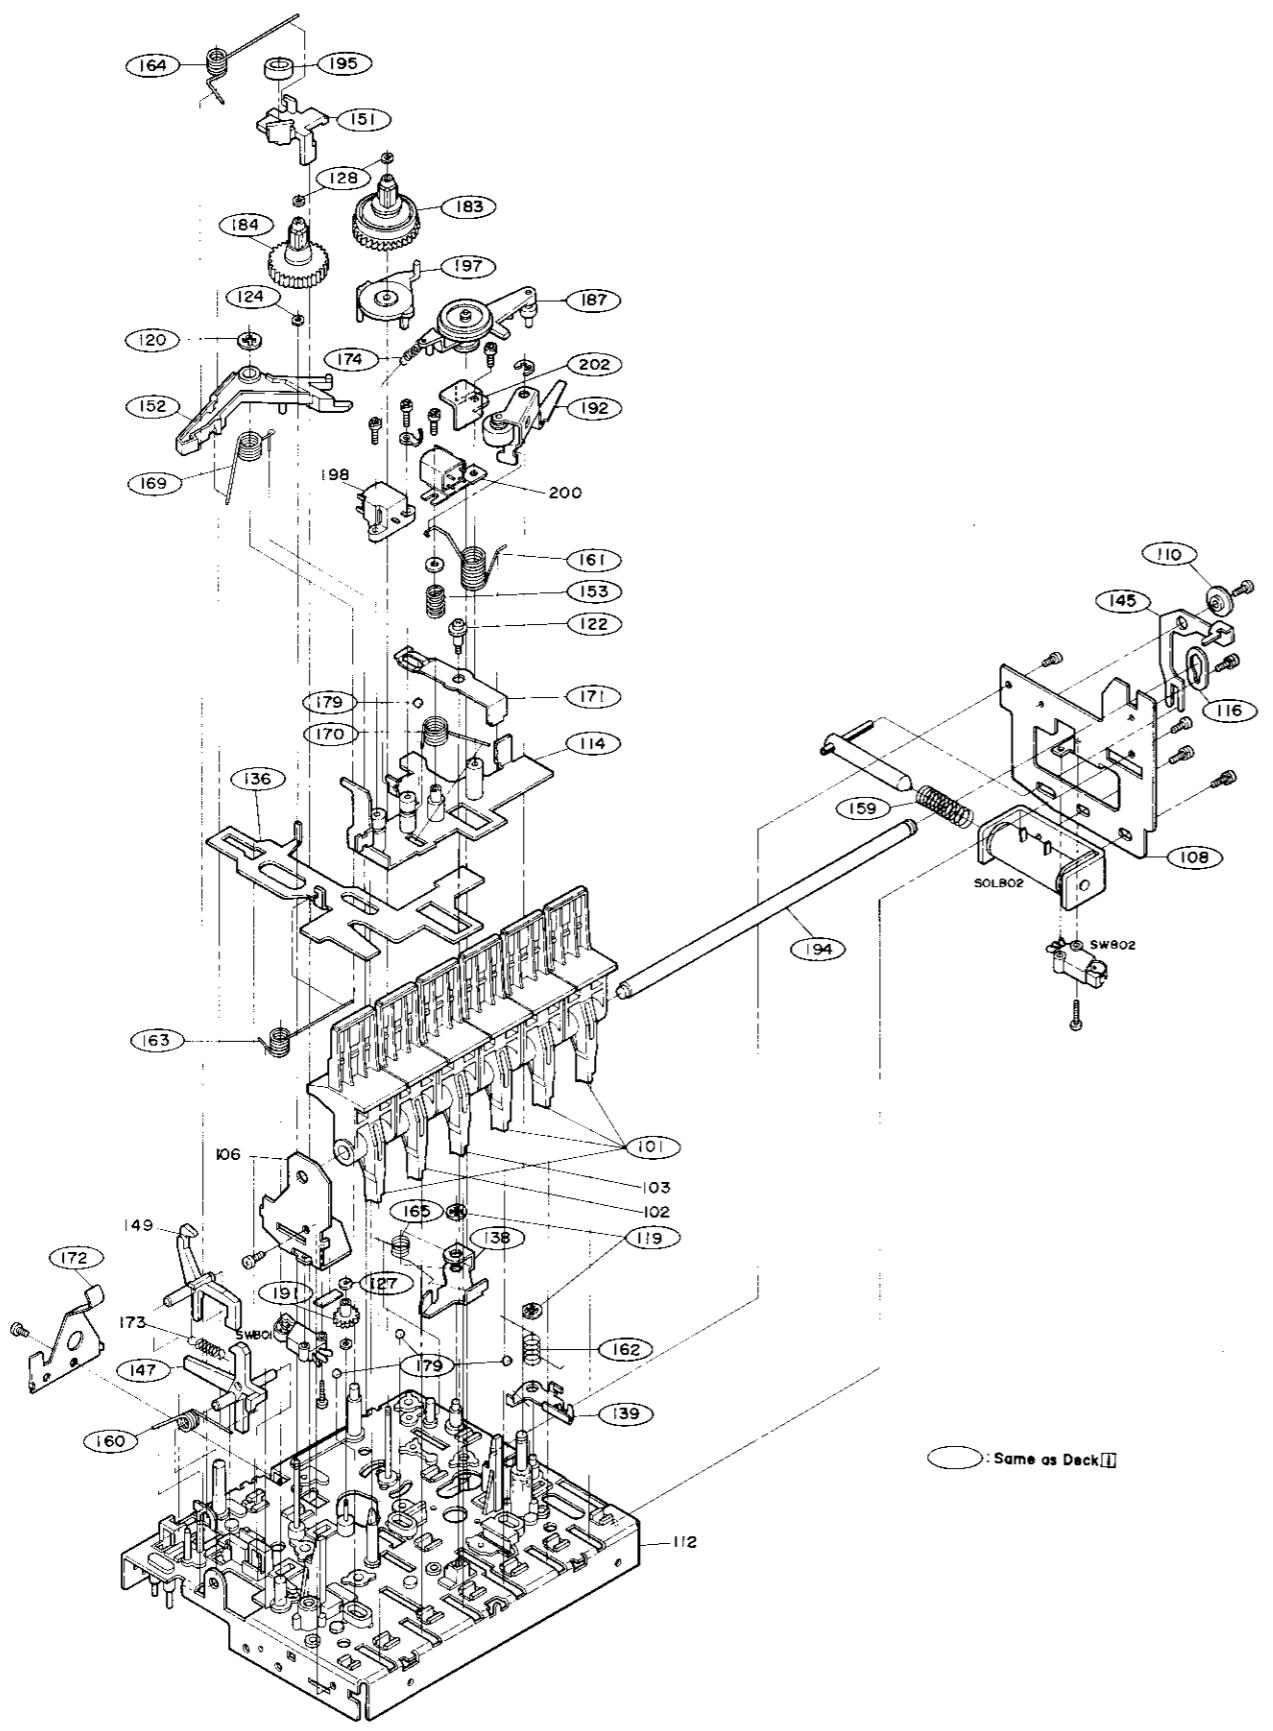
DECK ② MECHANISM EXPLODED TOP VIEW
